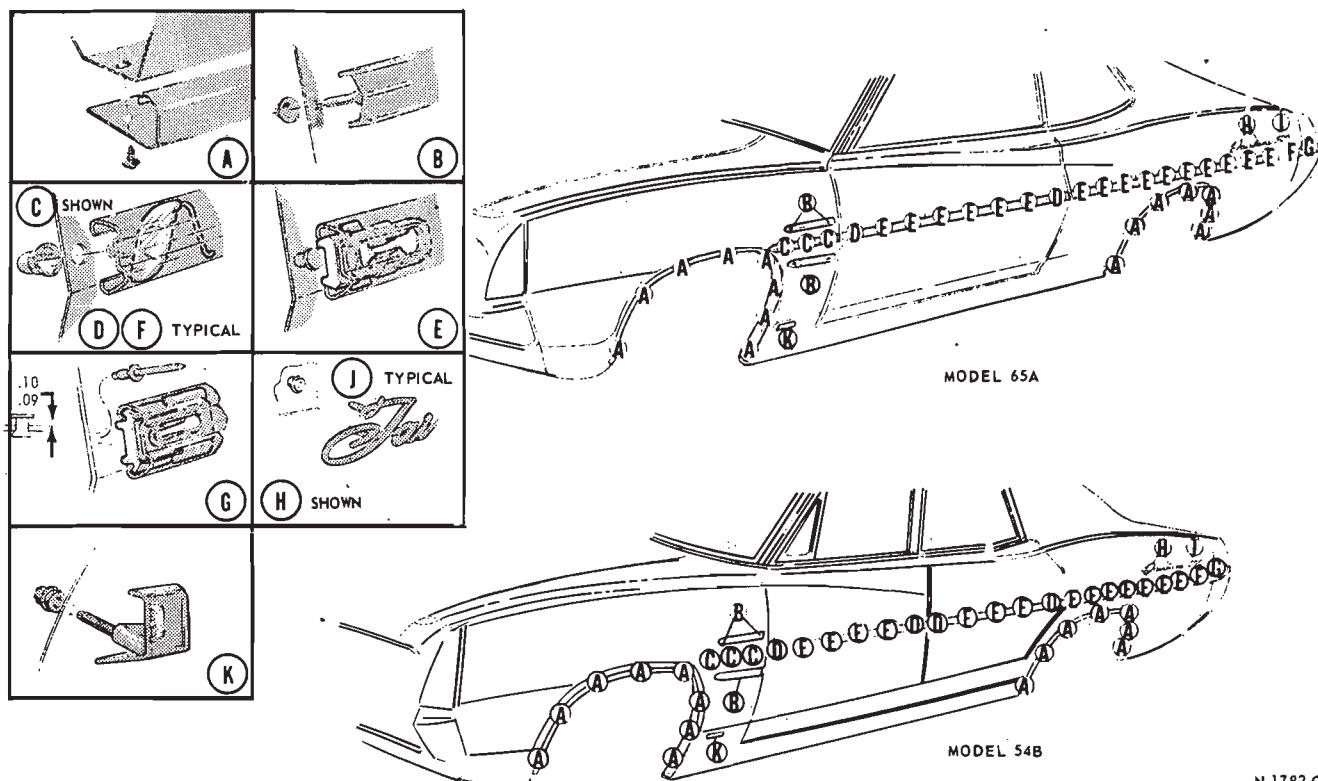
Fairlane Exterior Side Moulding Installation—Models 54A and 65A
